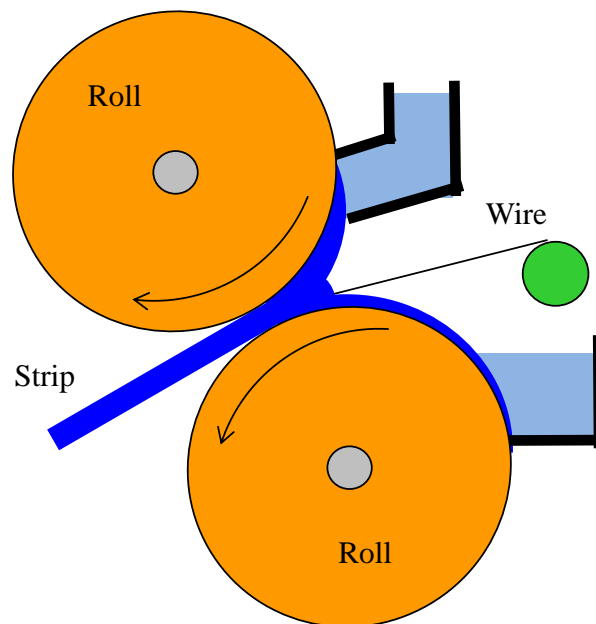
The twin roll caster for fabrication of wire-inserted composite strip.
